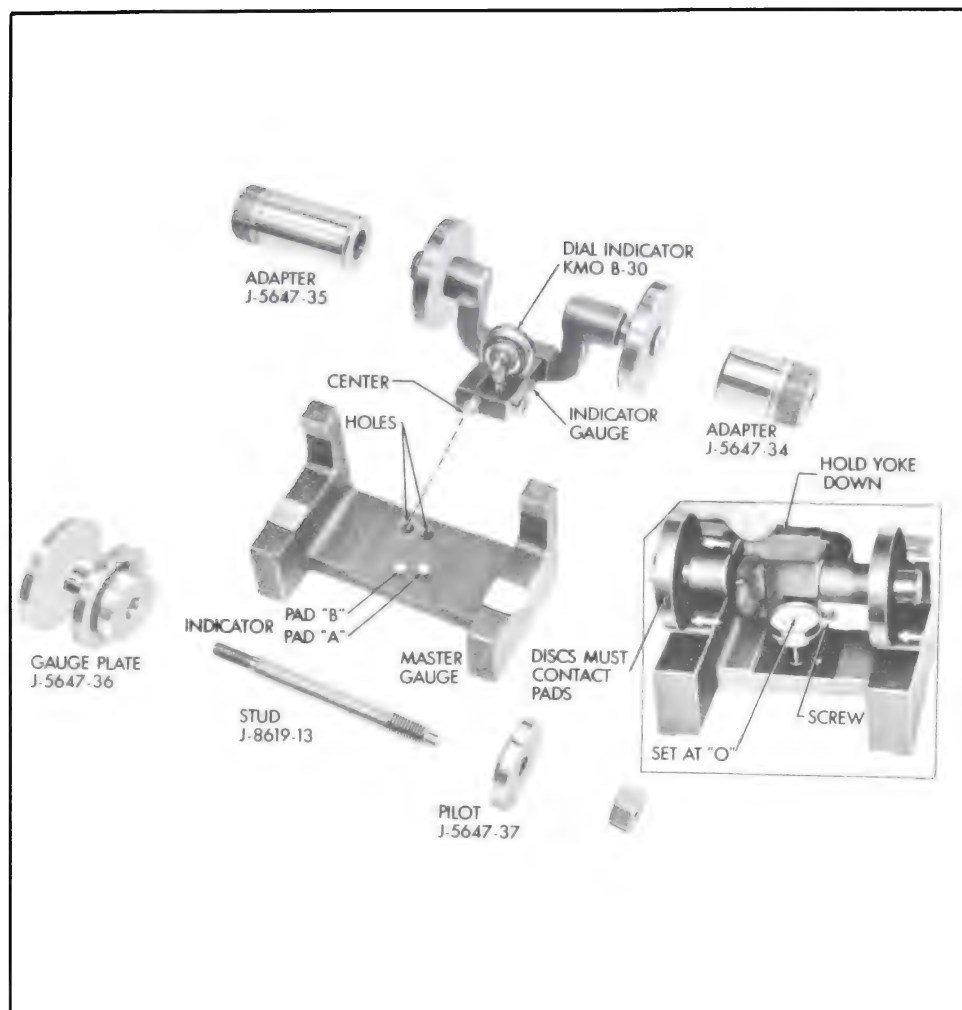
Pinion Setting Gauge J-5647 and Adapters
